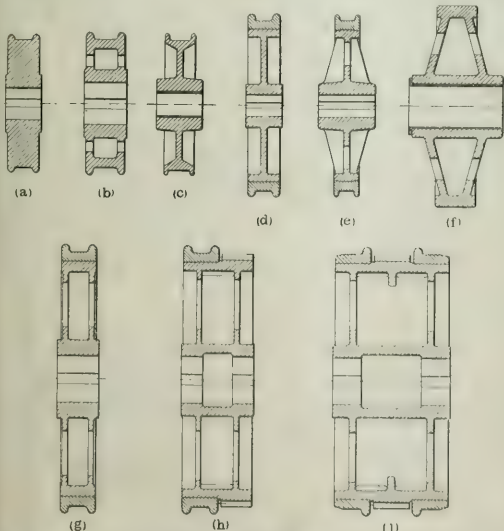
TYPICAL TROLLEY AND END TRUCK WHEELS.
